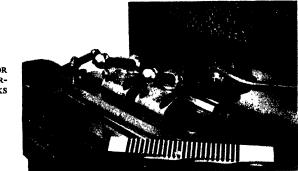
ATTACHMENT FOR ADAPTING A GEAR GENERATOR FOR CUTTING RACKS (W. E. Sykes, Ltd.)
